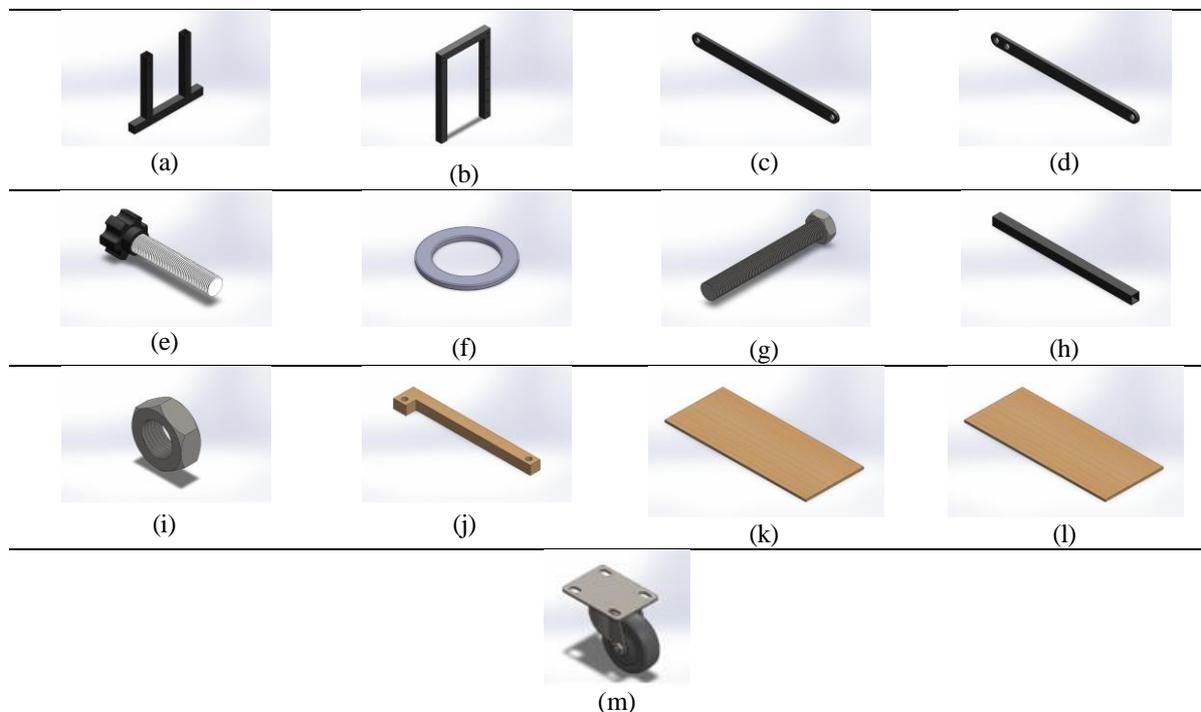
Design parts (a) Base, (b) Adjustable base, (c) Handle 1, (d) Handle 2 (e) Safety pin, (f)Washer, (g) Bolt, (h) Connector, (i) Nut, (j) Side panel, (k) Top panel 1, (l) Top panel 2, (m) Wheel
